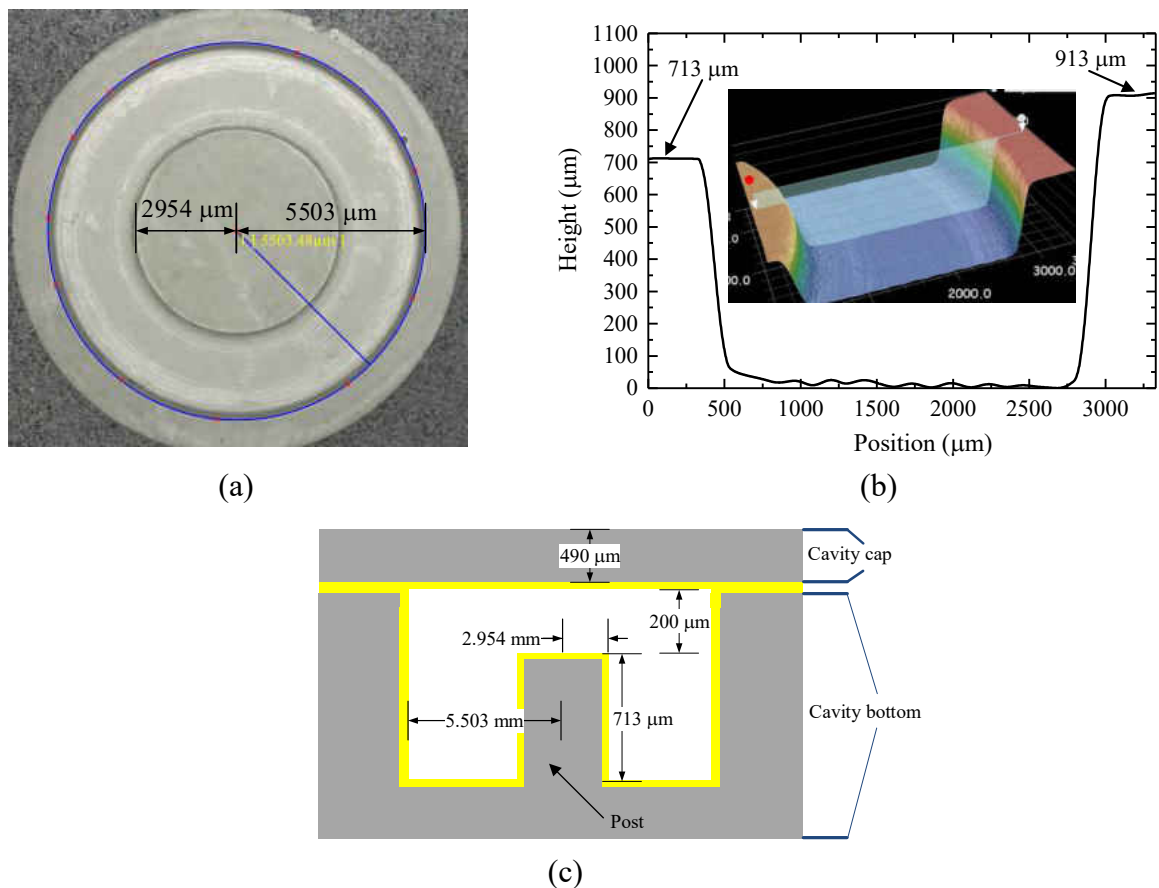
(a) Top view and (b) 3-D profile of the PDC cavity bottom after the platinum metallization. (c) Cavity dimensions after fabrication.
